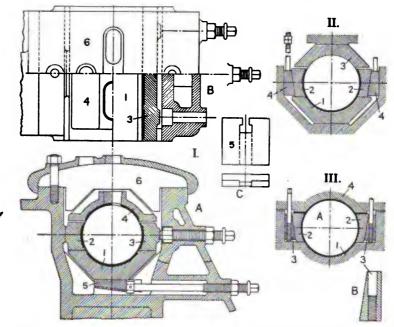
Bearings for Engines of the Corliss Type. I. For frame in Fig. 241, shaft in Fig. 312 I., scale 1 to 24; II., III. Different arrangements of the wedges.
